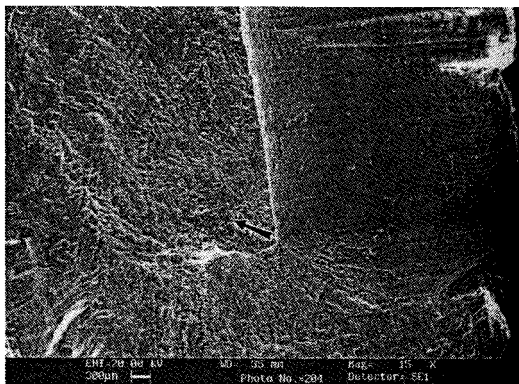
The scanning fractograph of the fracture surface close to the threaded fastener hole undercut. Striations confirm fatigue fracture. Arrow indicates the direction of crack growth.
